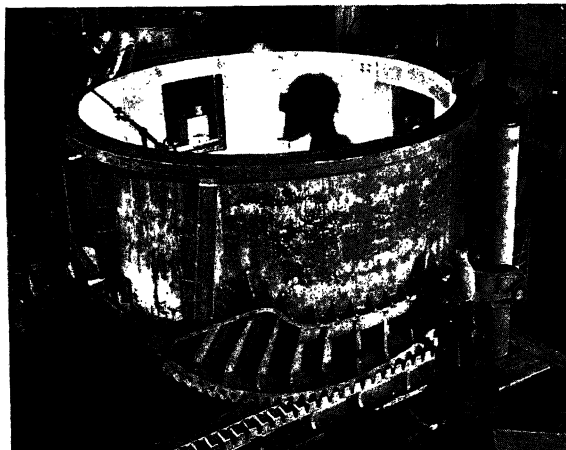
Toothed rocker with fixed rack. Furnace under construction. (Courtesy *Pittsburgh Lectromelt Furnace Corp.*, Pittsburgh, Pa.)
